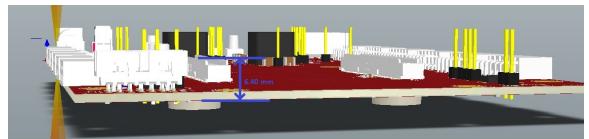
bottom of PCB to top of JX.x connector - 6.40 mm
